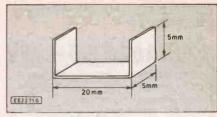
Suggested alternative heatsink dimensions for IC1.
